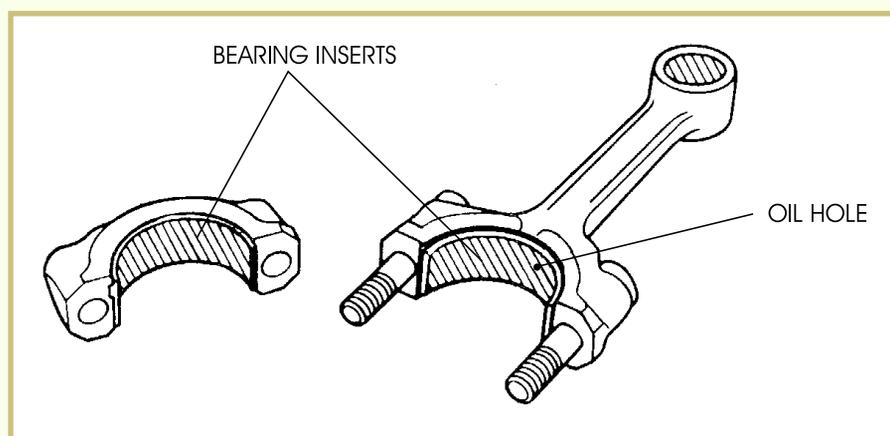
Bearing Inserts in a Two-Piece Connecting Rod
